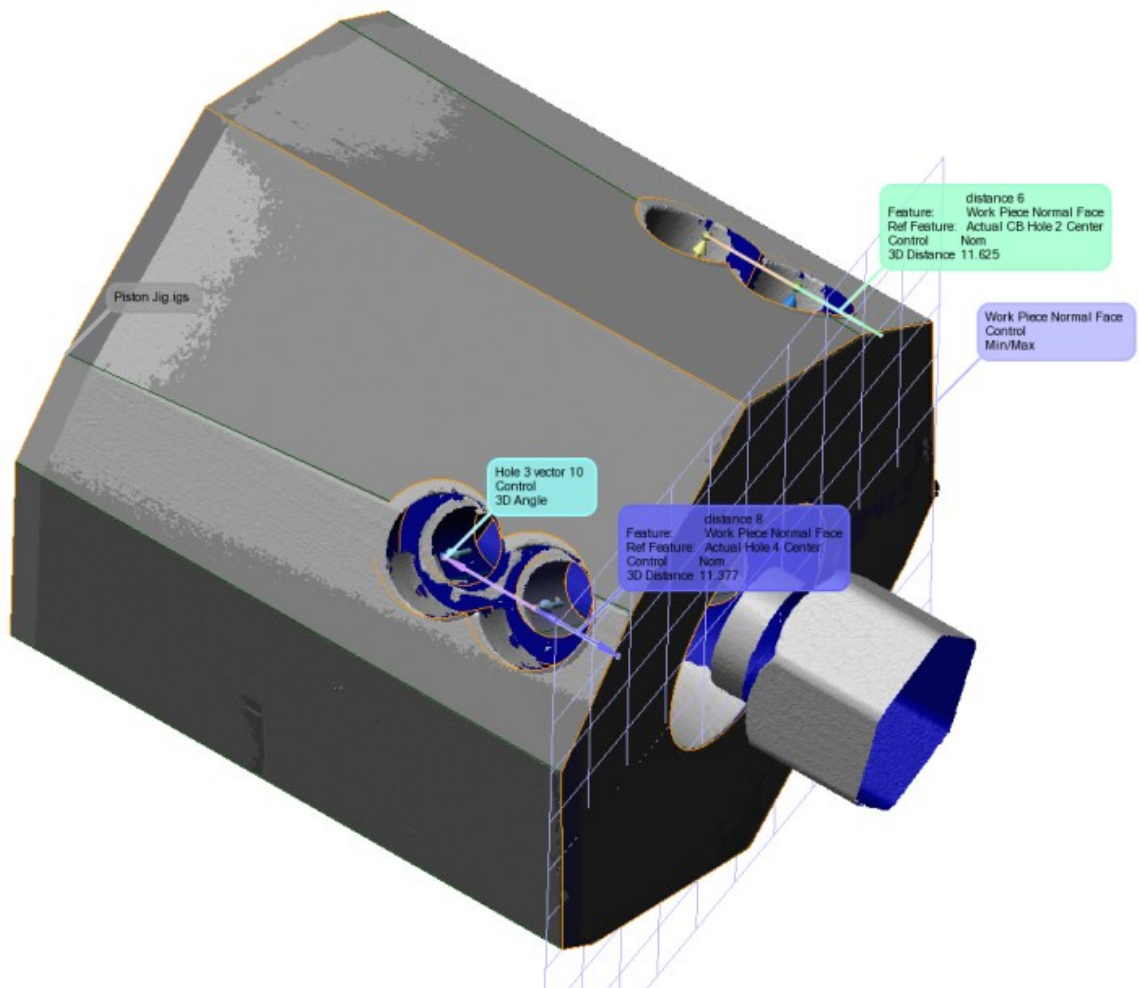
Scanned model of piston jig for calibrating groove cutting specifications. After the accuracy of the jig was measured, the front face of the jig needed to be faced to allow for clearance of the grooving tool. The face was reduced by 0.050"; therefore the center of the hole that holds the piston cylinder was now 0.050" from the face of the jig. This is important to positioning the cutting tool for the faces of the grooves to be
